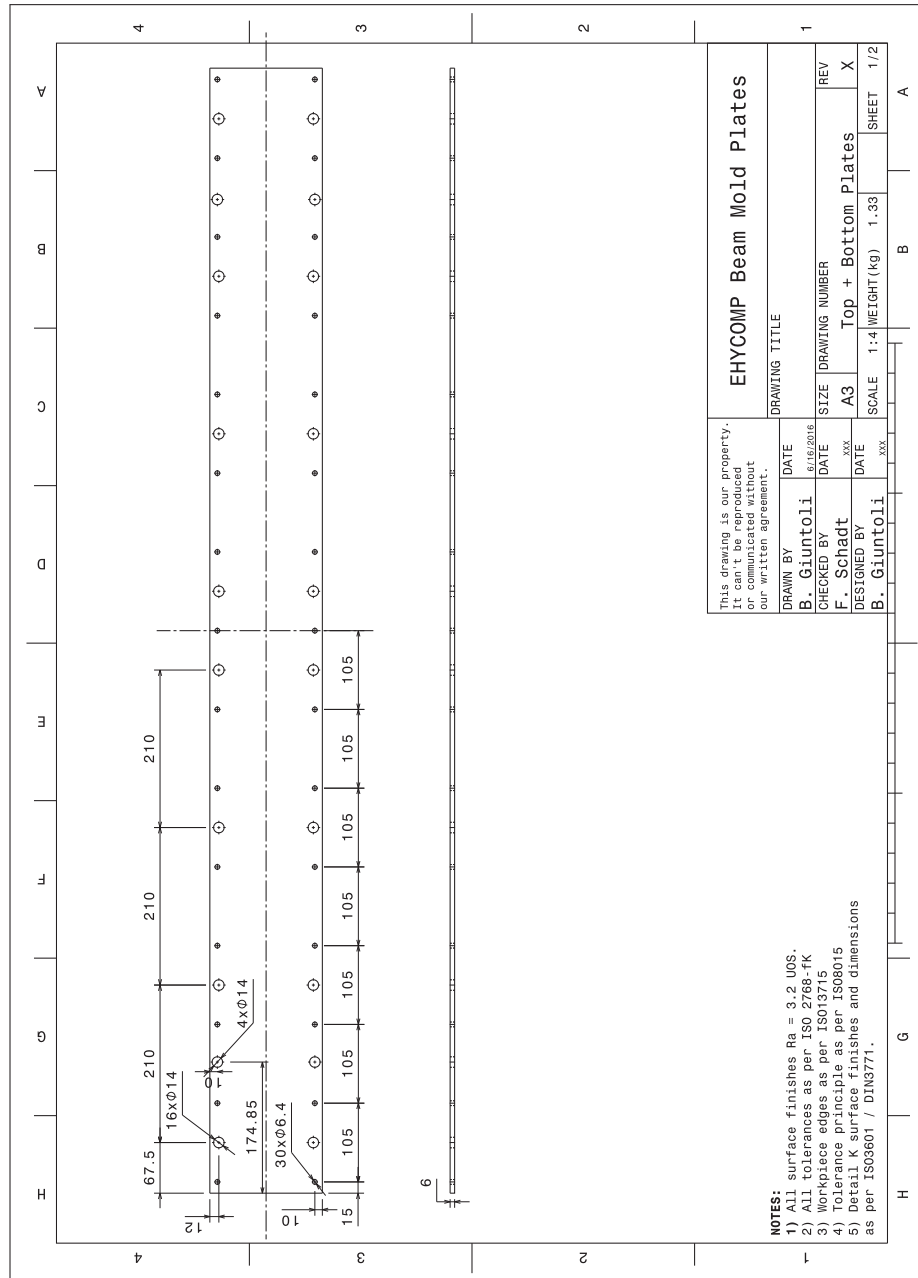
Channel Closing plate for Top and Bottom side heating
